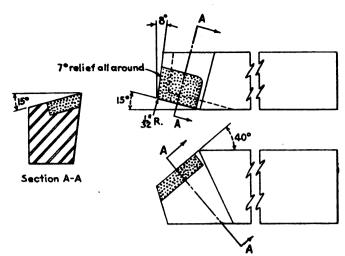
Carboloy tool with extreme negative rake used to obtain a "shear" cut. This tool is best suited to roughing cuts on large diameters. It is not recommended for most finish cuts because the chip curls toward the work and spoils the finish
